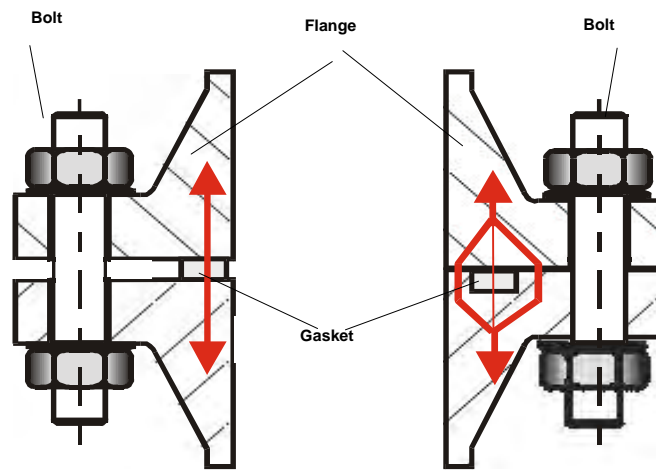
Bolted flange connections of floating (left) and metal-to-metal contact type (right)
